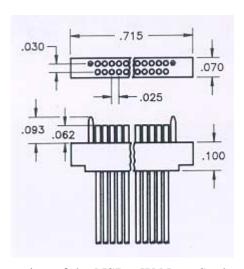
Drawing of the NSDx-W Nano Socket Connector
